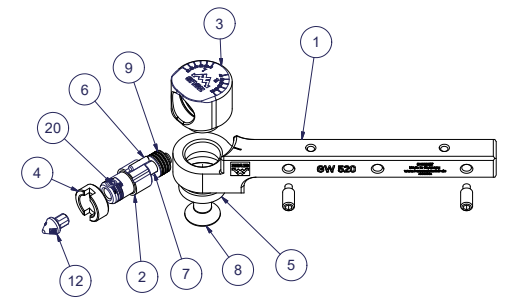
Exploded diagram of Swiss-type lathe version GW520-10R
